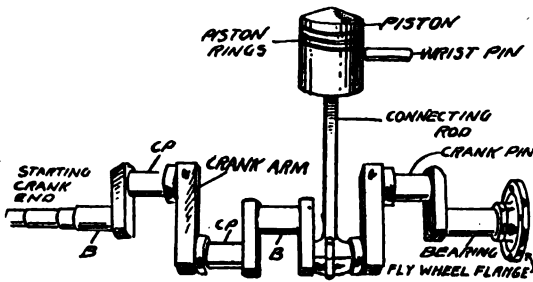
A solid type of crank shaft—three bearing type, four cylinder.
